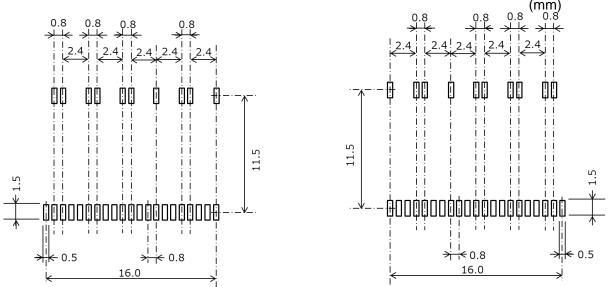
P-HSSOP31-0918-0.80-001 pad dimensions
